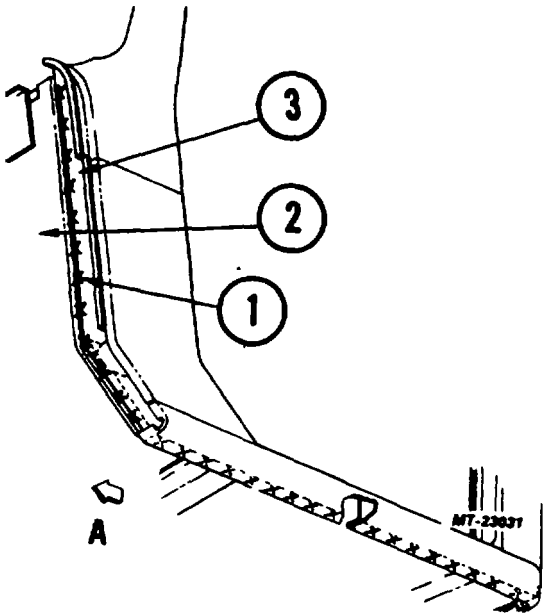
Filler Panel to Dash Panel Spot Welds
